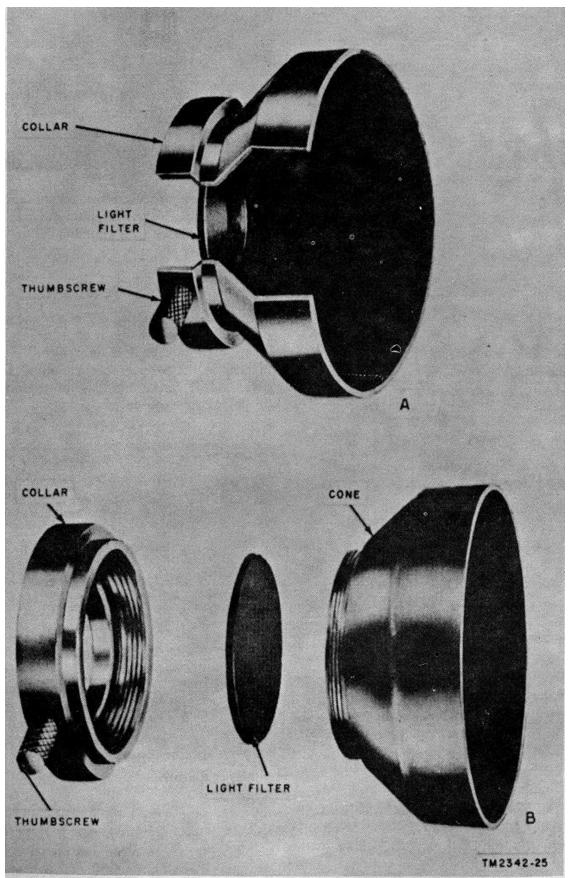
Lens shade and unmounted light filter, cutaway and exploded view.
